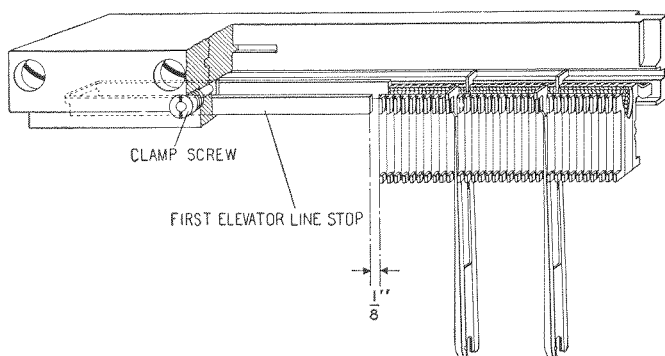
View of the inside of the first-elevator jaw, which is toward the mold, showing a line of matrices in position, and showing the first-elevator line stop and clamp screw for same.
